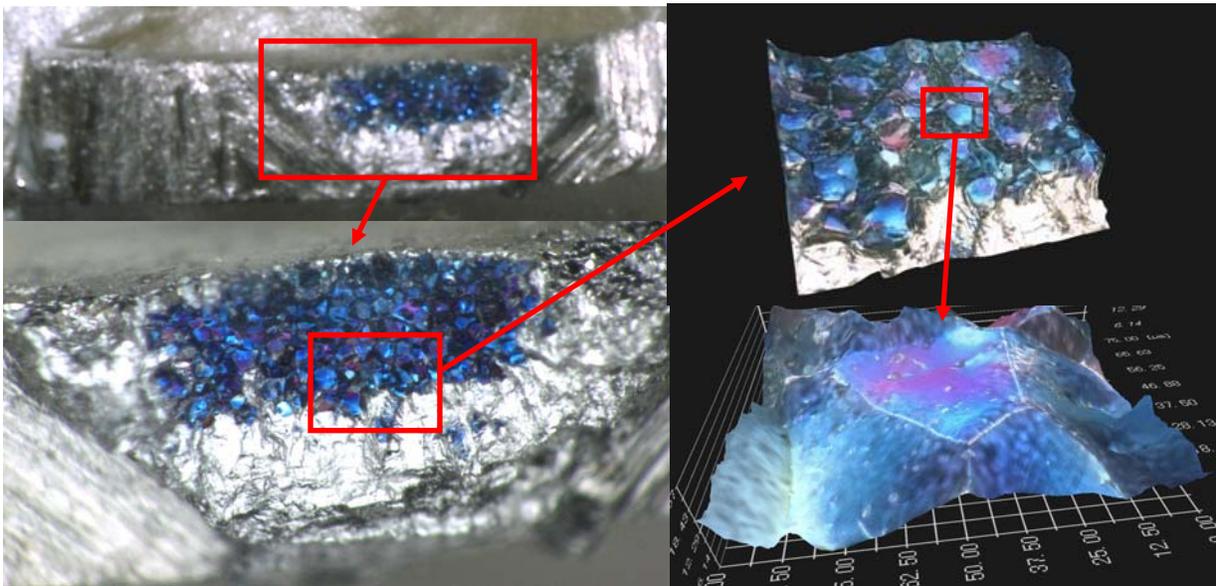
Specimen 3 Microscopy: Upper (~20x) and Lower (~40x) Left Images – Optical stereomicroscope images of fracture showing intergranular nature/“rock candy” appearance of crack morphology. Upper (~150x) and Lower (~1500x) Right Images – High magnification close-ups via Keyence digital microscope. All images display the vivid blue discoloration of fracture surface (result of oxidation).
